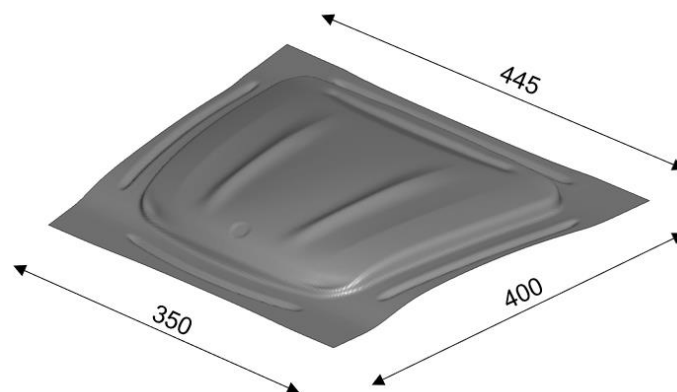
Isometric view of miniaturized bonnet stampings. Dimensions in mm.
